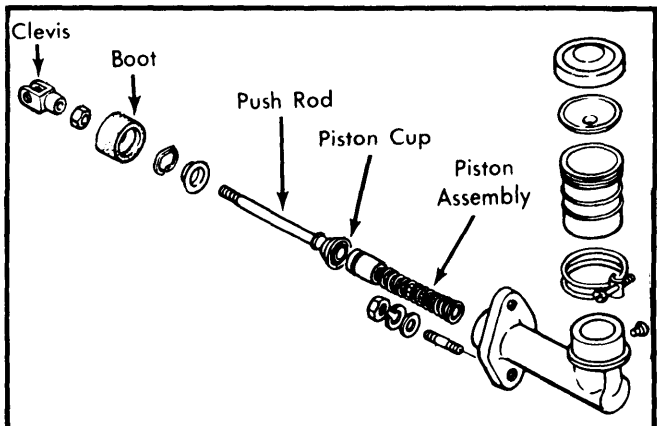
Exploded View of Clutch Master Cylinder Showing Relationship of Internal Components
